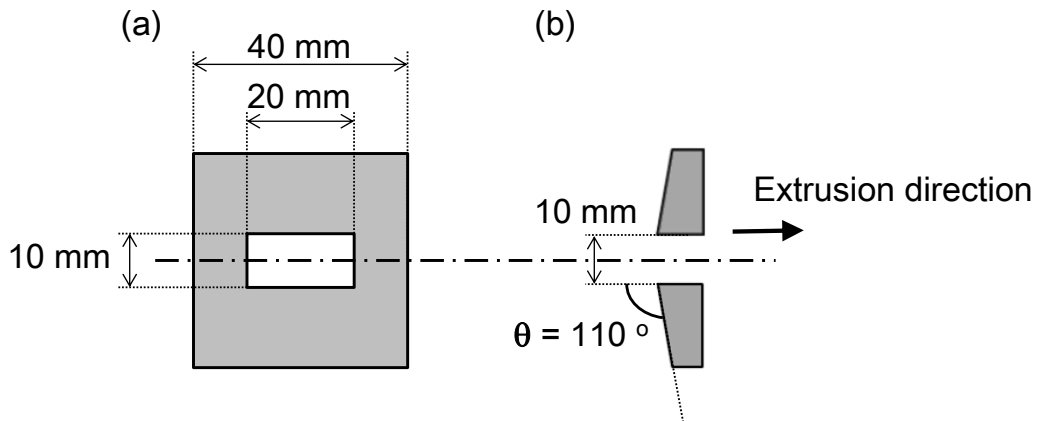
Schematic drawing of the die for sheet fabrication; (a) overhead view of the die and (b) cross section of the die.
